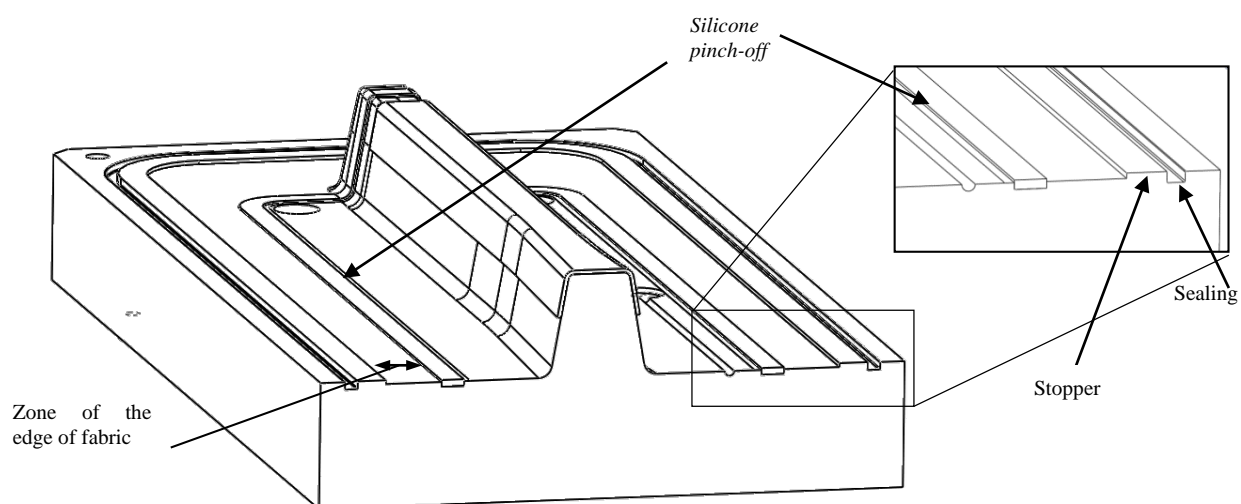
Cutaway view of the male mould of the spar wing and detail of the pinch-
